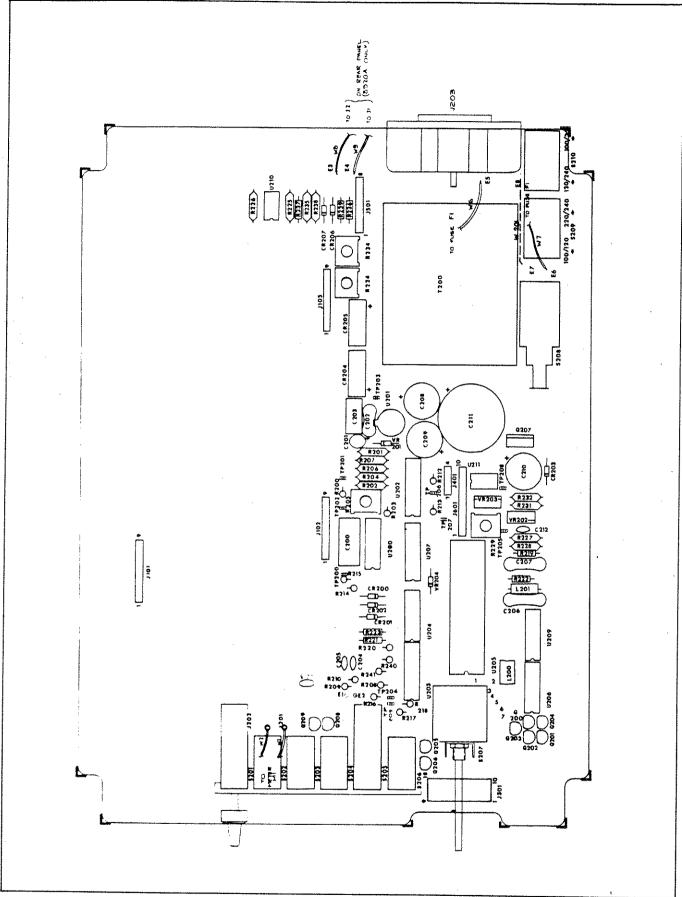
A1 8920A Main PCB Assembly (cont)
